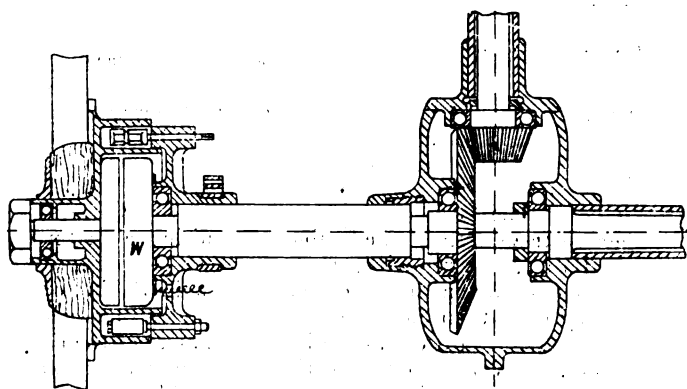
Sectional view of Half of Rear Axle of "Ampere" Car.
